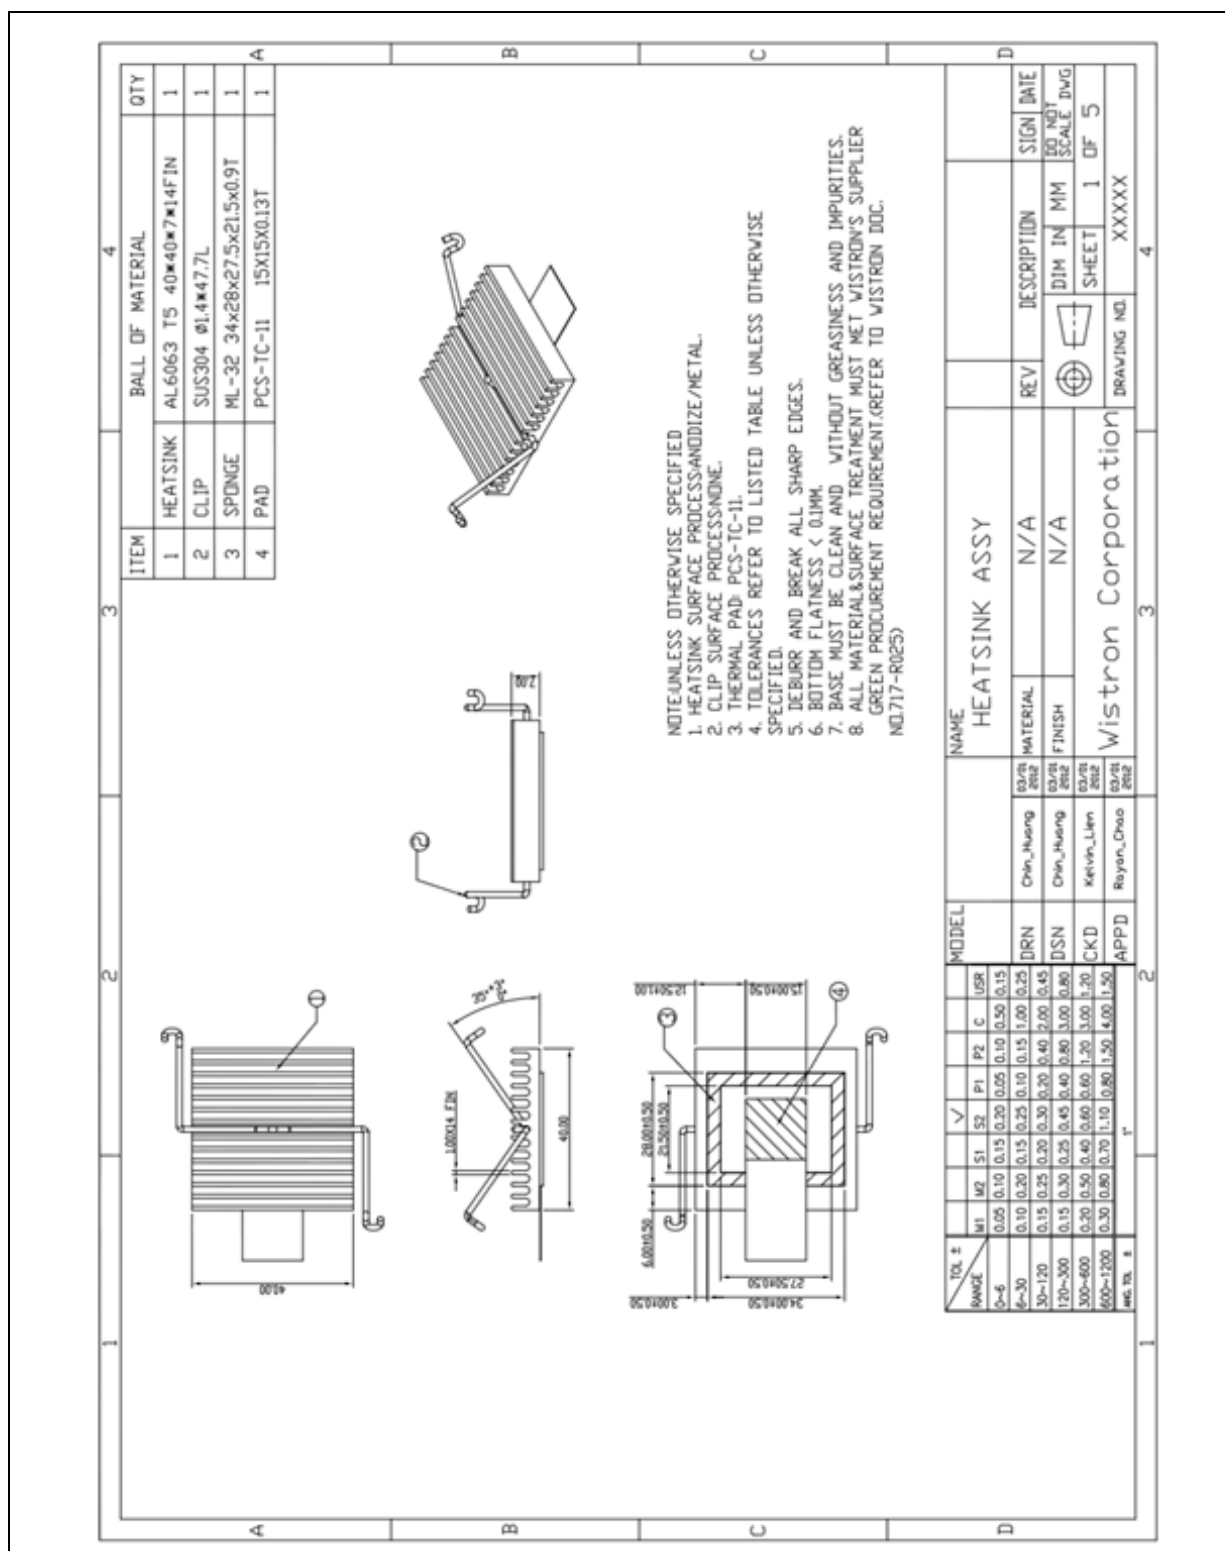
Low-Profile Torsional Clip Heatsink Drawing
